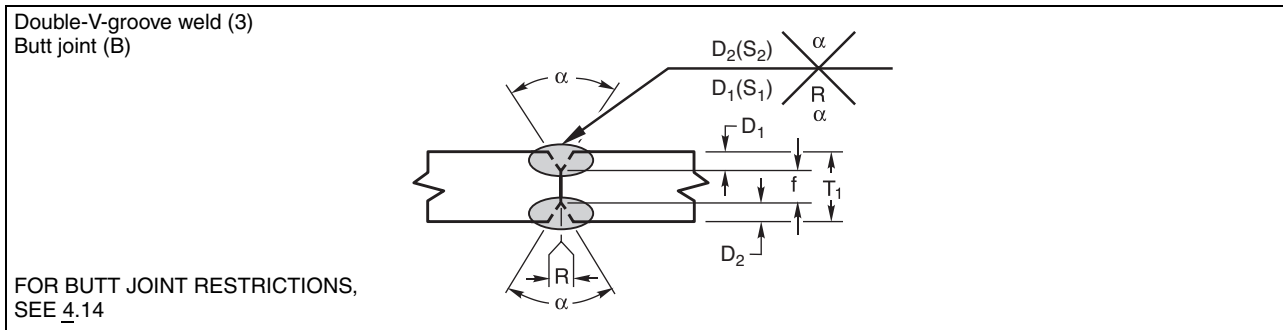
Details of Welded Joints for PJP Groove Welds (see 4.13.1)
